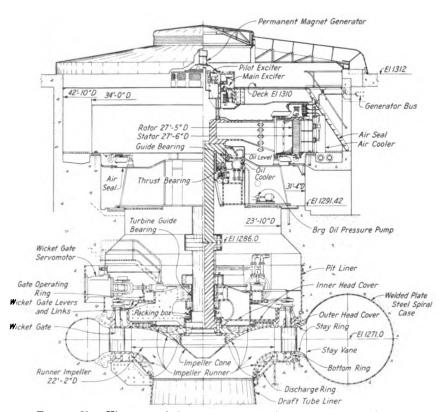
Hiwassee unit 2—pump-turbine and motor-generator section.
